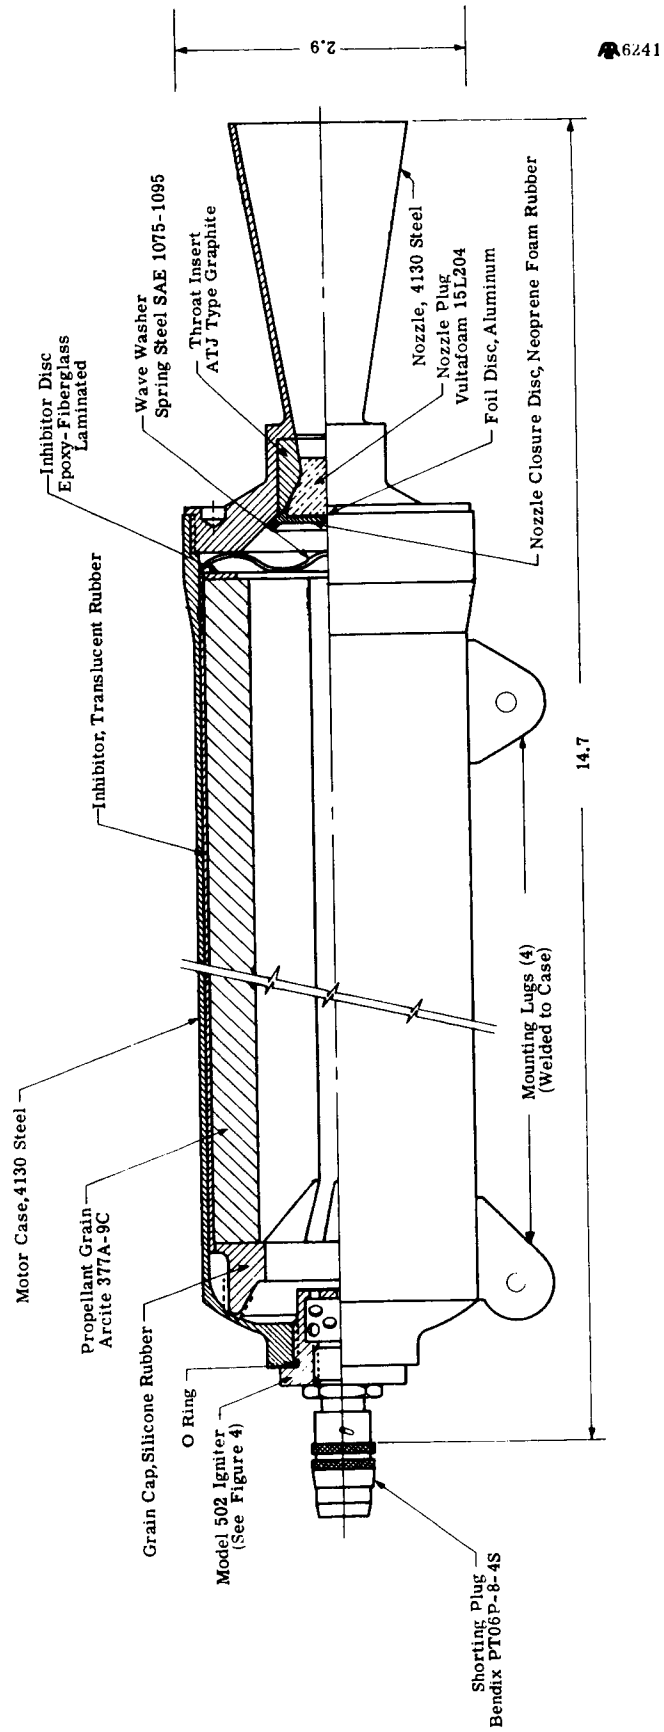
Cutaway View of MARC 7G1 Rocket Motor Assembly Tested in Original Evaluation Program.
